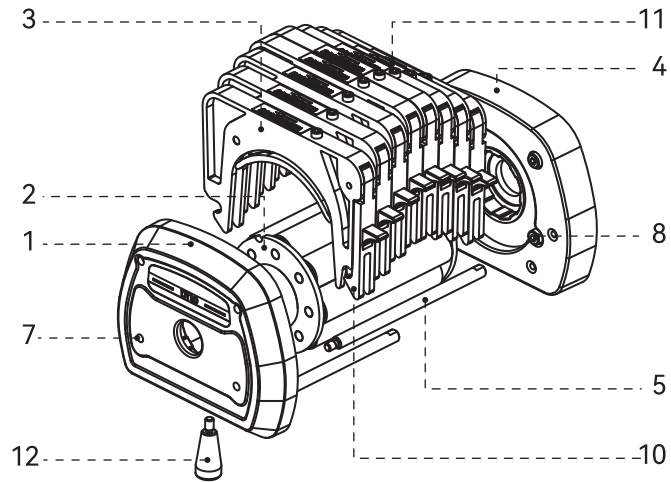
DT10 Pump Head (Equipped with 10 card assembly)
